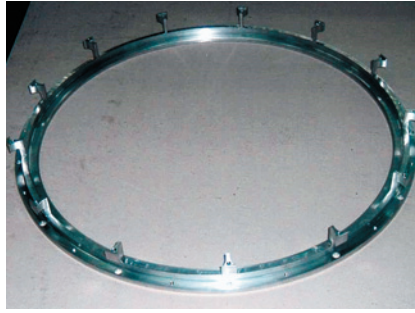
Nothing's impossible: So far, Hilbring has not had to send away any customers empty handed whose component parts can be processed on the machine. This small selection of workpieces testifies to the adaptability of the young machining expert.
